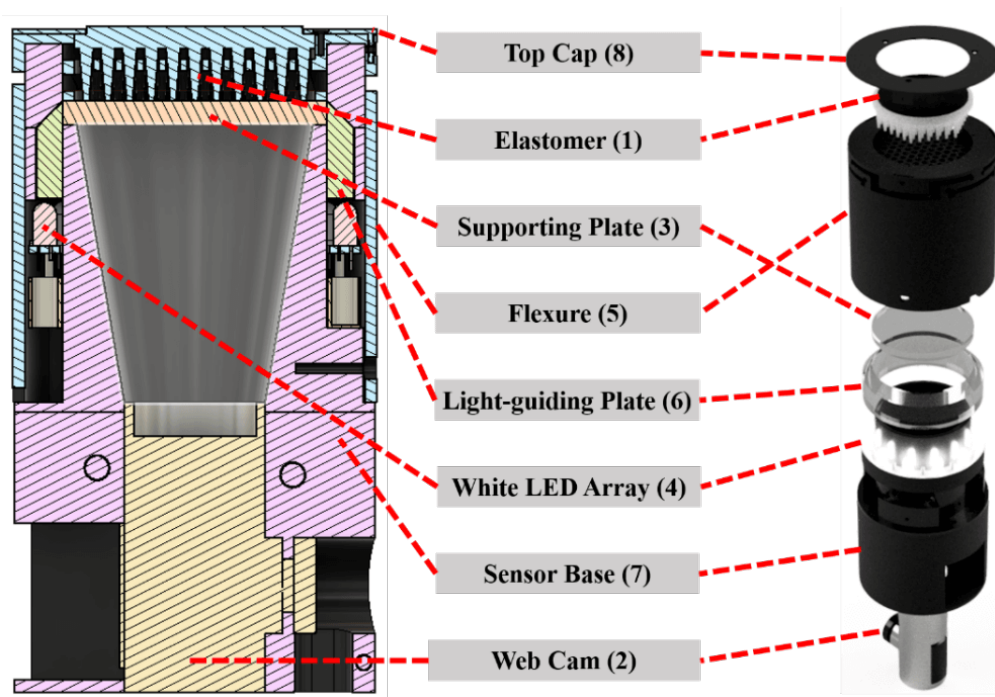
An optical-based tactile sensor design. Left is the schematic design and right is the exploded view of the sensor prototype. There are eight core components that make up the sensor.
